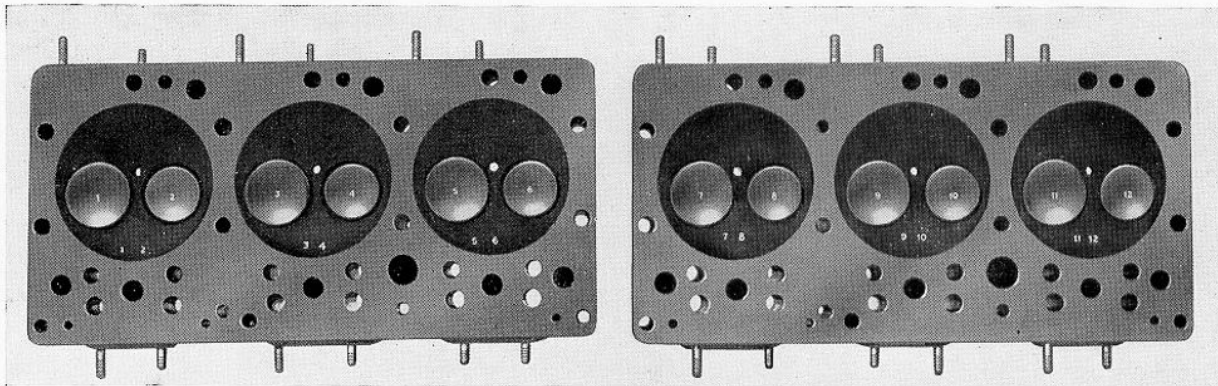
POSITION OF VALVES IN CYLINDER HEADS
